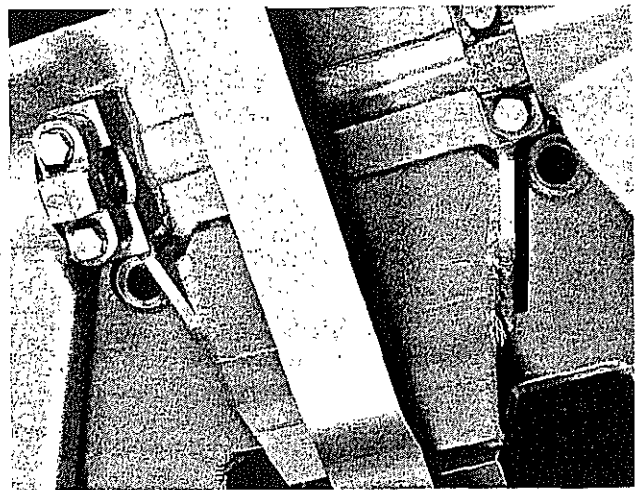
Steering Clutch Compartment Drains (T-11833)
